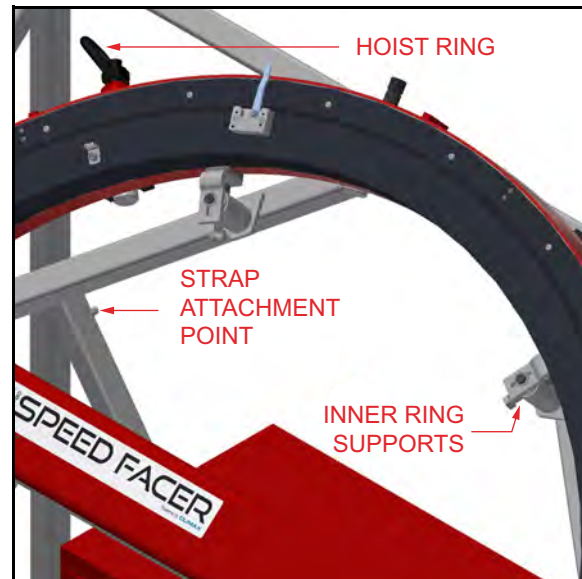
HOIST RING, STRAP ATTACHMENT POINT, AND INNER RING SUPPORTS (ODF80 SHOWN)
